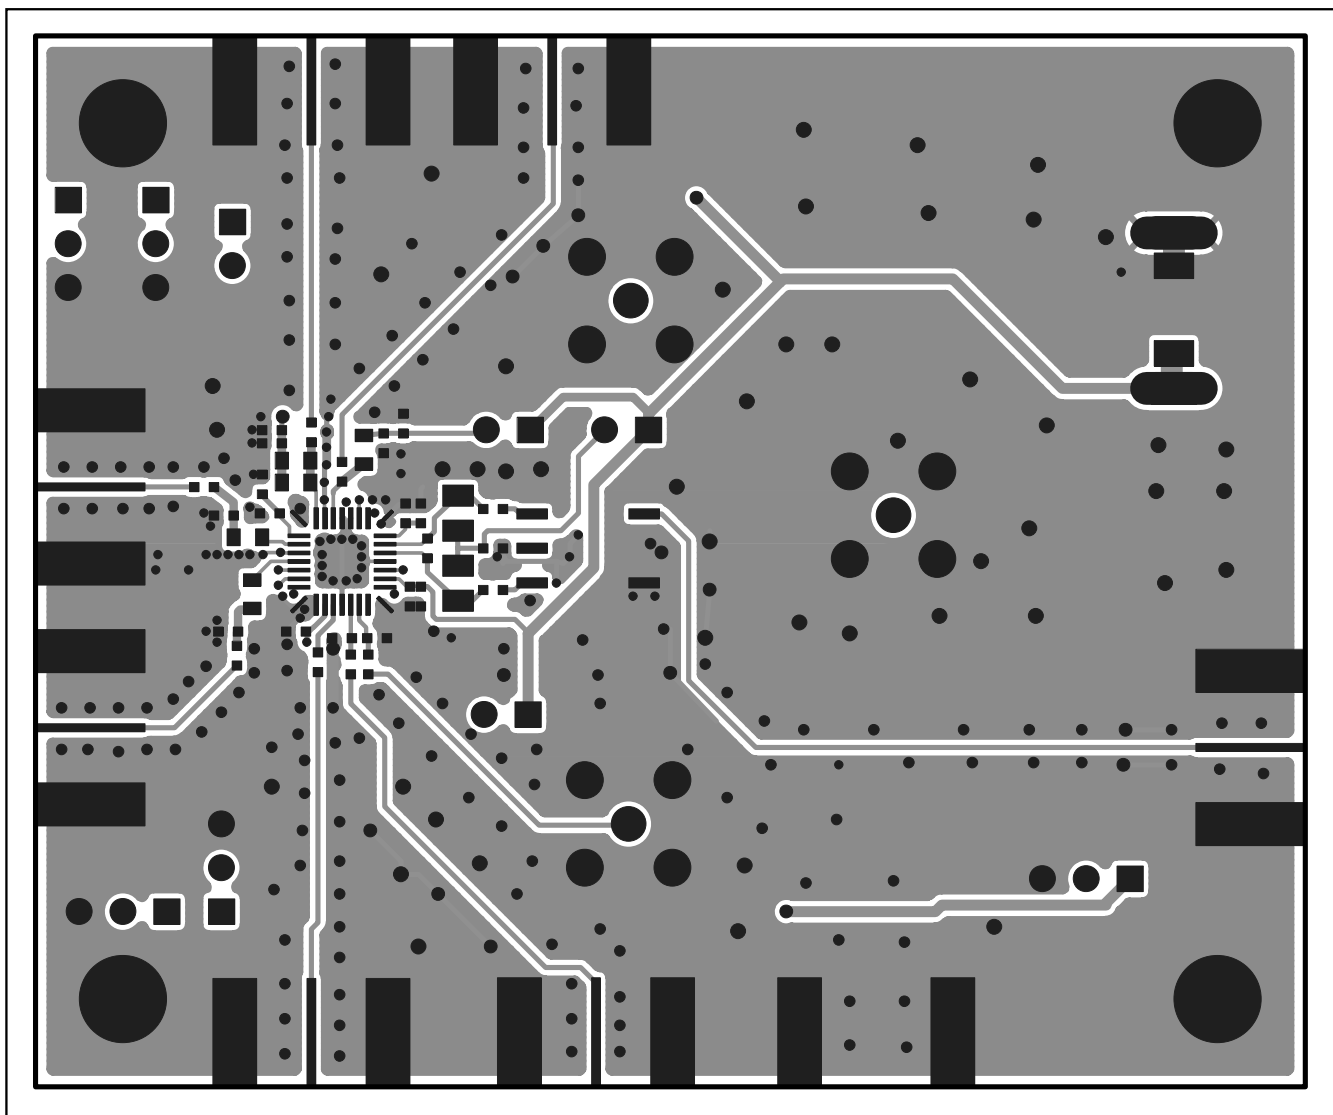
MAX2335 EV Kit PC Board Layout—Front Side
